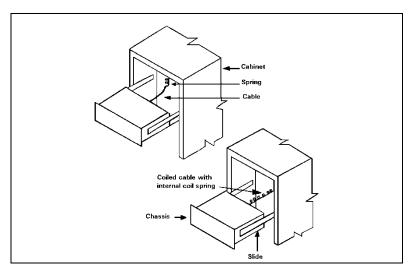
Recoiling slack cable.
